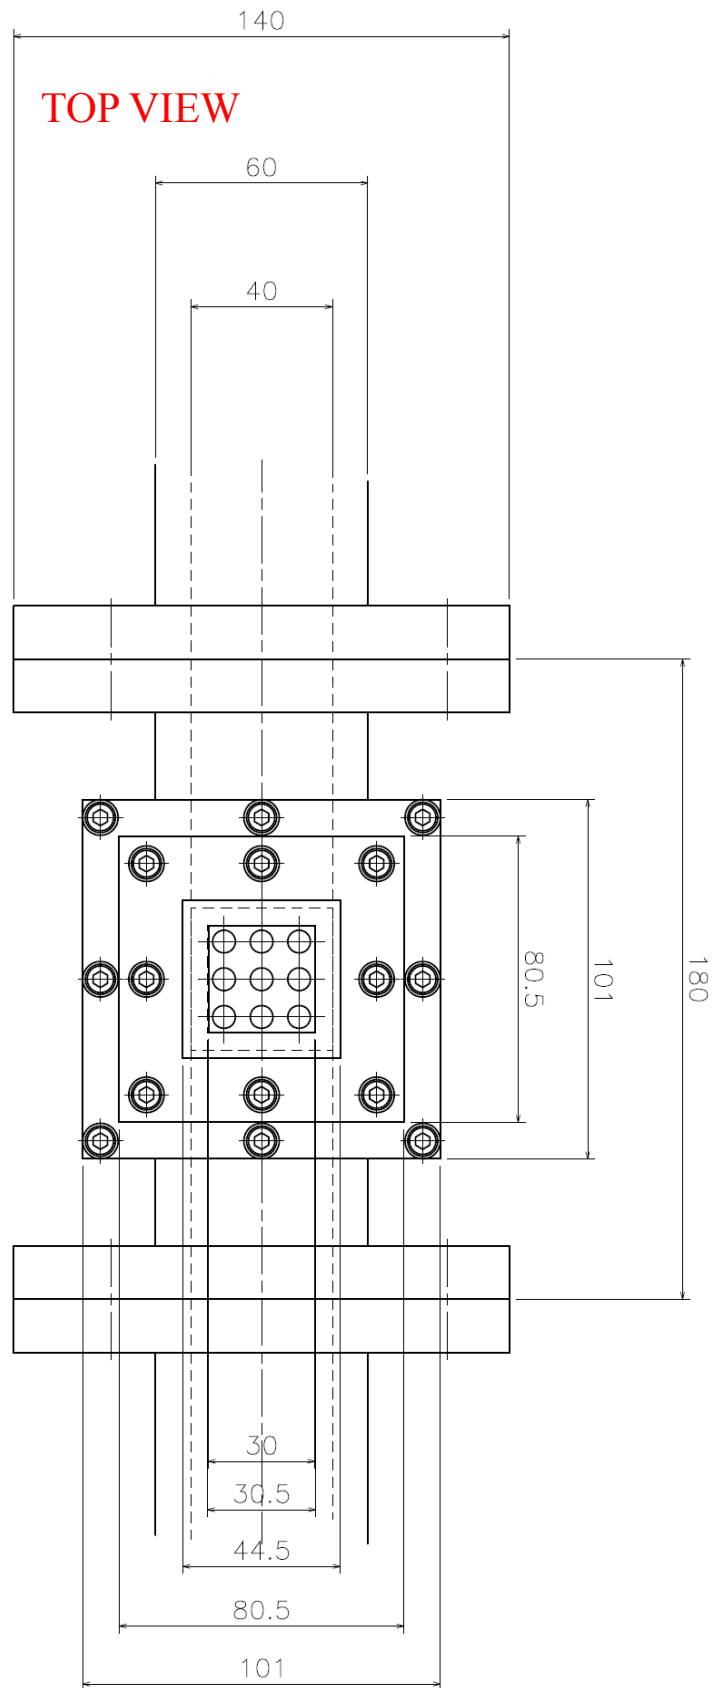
Top view of the test section design used in the new facility (dimensions in mm).
